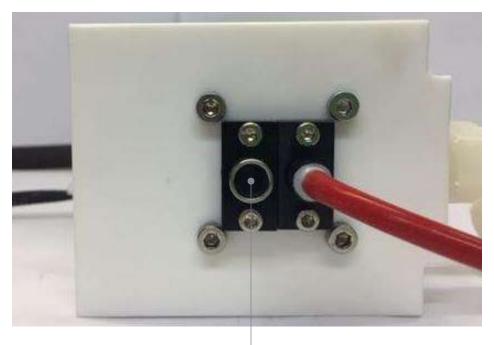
(Red-wired End Cap Installation [Repeat for Black-wired End Cap)
